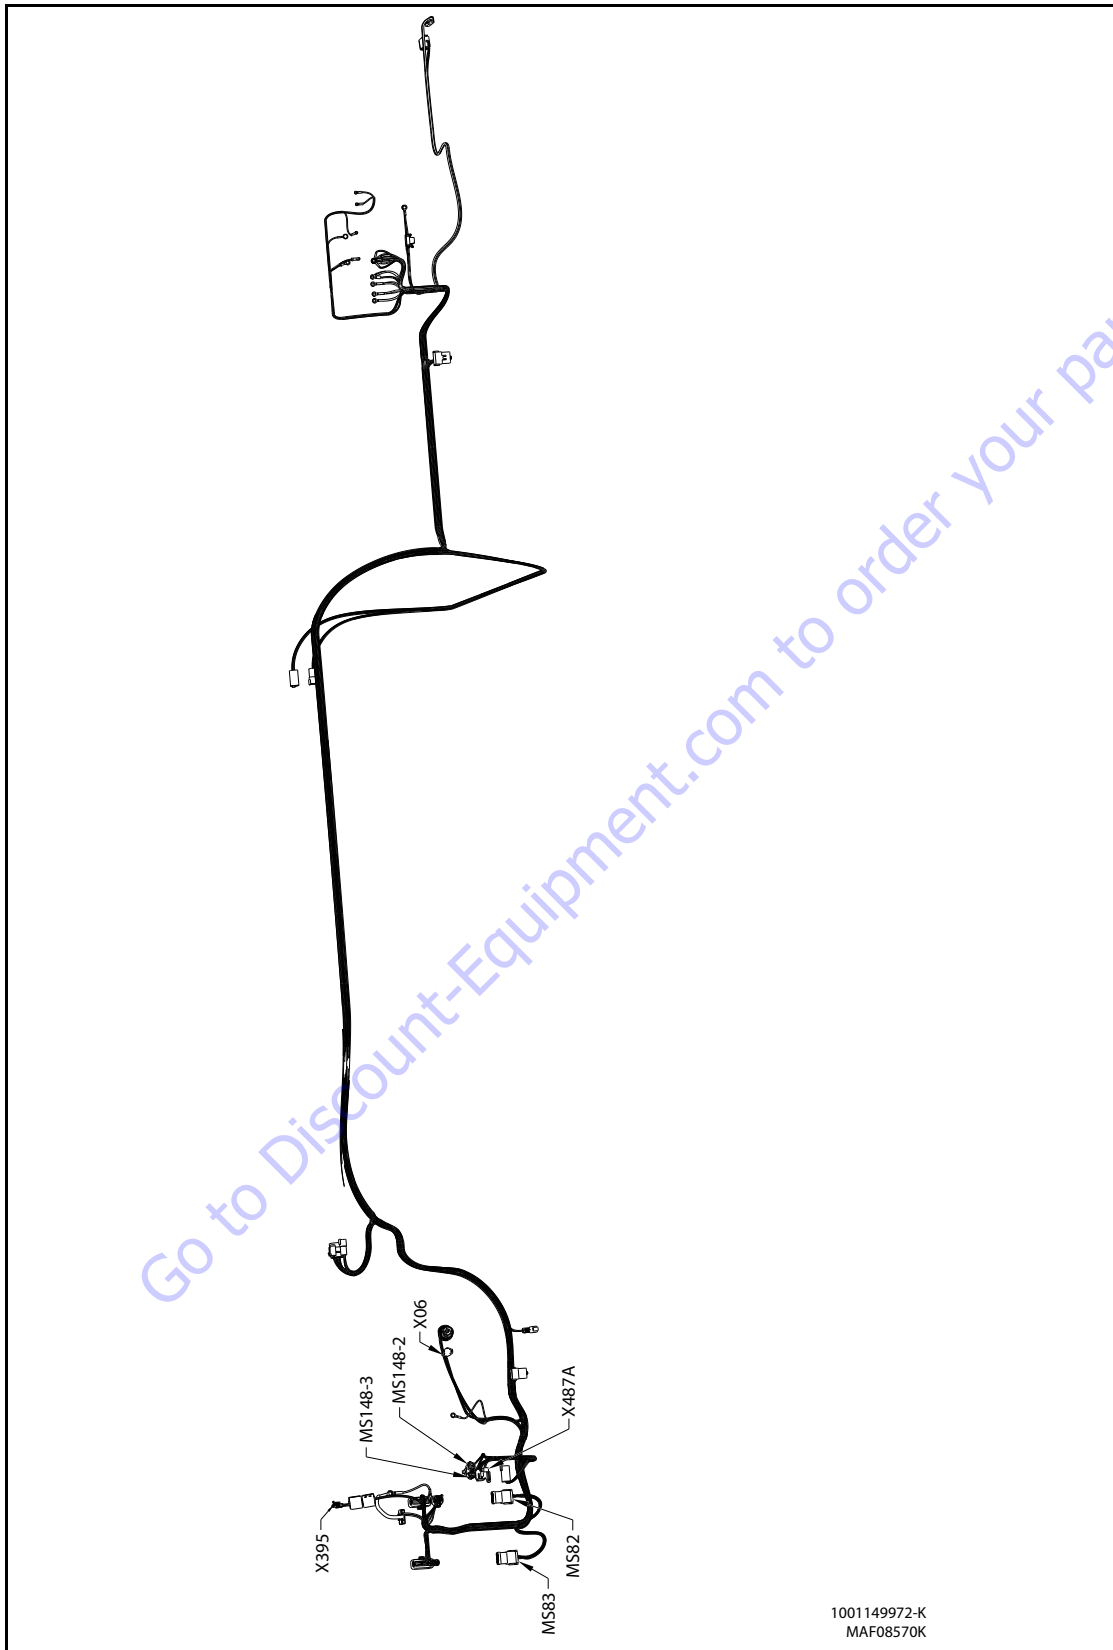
Turntable Wiring Harness - Sheet 3 of 3
